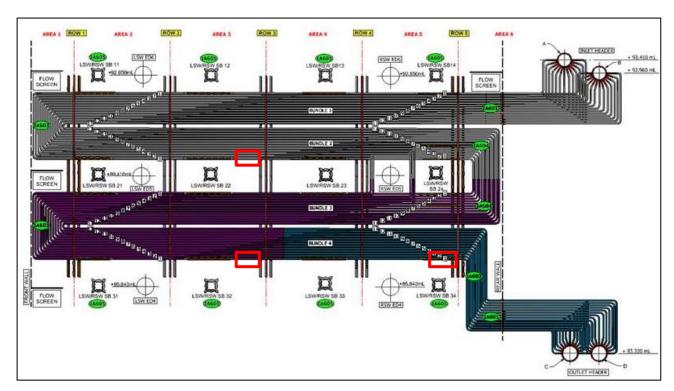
Schematic drawing of RH1 showing where Tube-SOLO inspected should be conducted.
